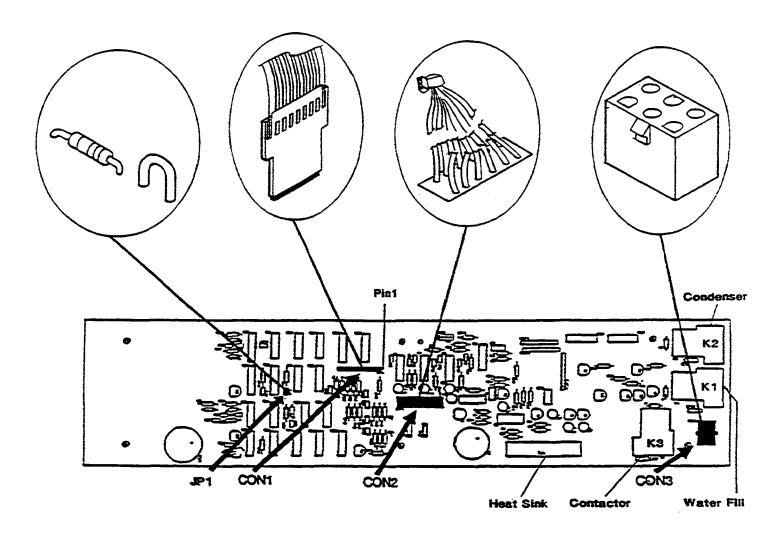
CONTROL BOARD PCB (pan # 101918)
